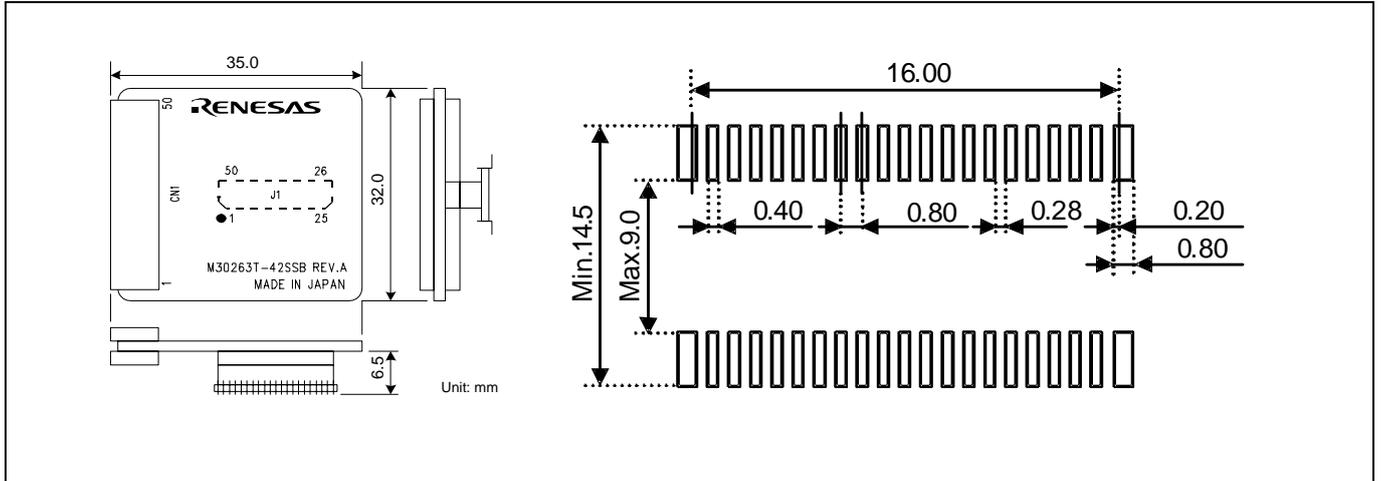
External dimensions and a sample foot pattern of the converter board M30263T-42SSB
